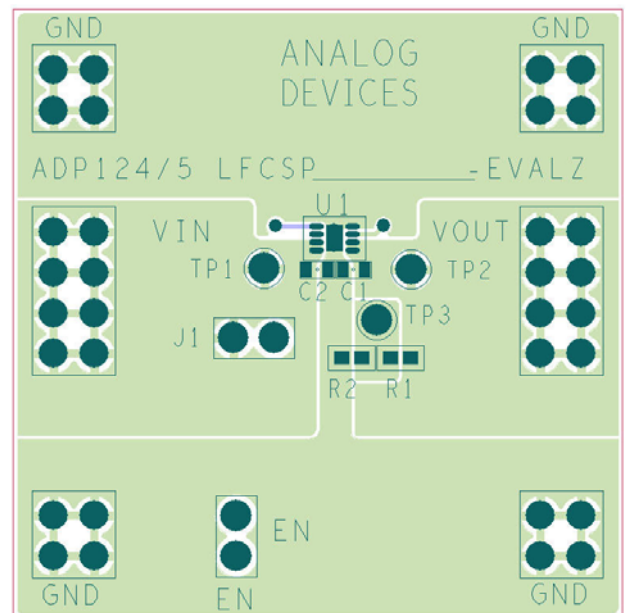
Example ADP124/ADP125 LFCSP PCB Layout
